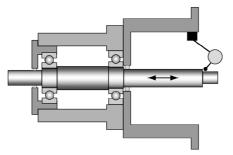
Method to Check Endplay or Axial Float of a Pump Shaft
